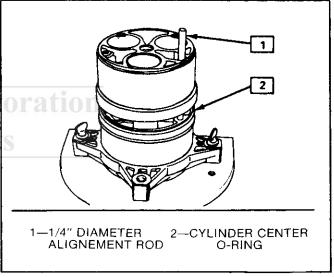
Cylinder Alignment Rod Through Cylinder Halves
